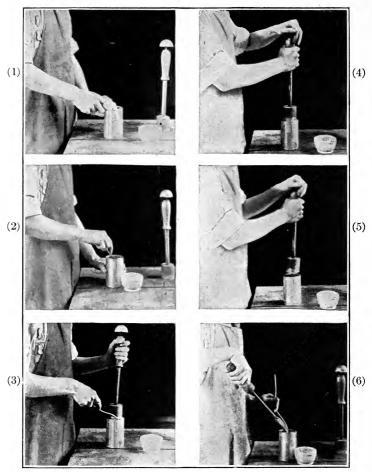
Capping and Tipping a Solder Top Can. (1) Wipe off groove and cap with cloth to remove sirup, pulp, etc.; (2) Wipe groove with brush dipped in soldering fluid; (3) Apply hot capping steel and melt solder of solder hemmed cap or melt a little solder from solder wire; (4) Turn the steel two or three turns backward and forward to distribute solder evenly; (5) Raise the steel, but hold lid down for 2 or 3 seconds by center rod to allow solder to set; (6) wipe vent hole with soldering fluid; apply hot tipping steel and seal with drop of solder.
